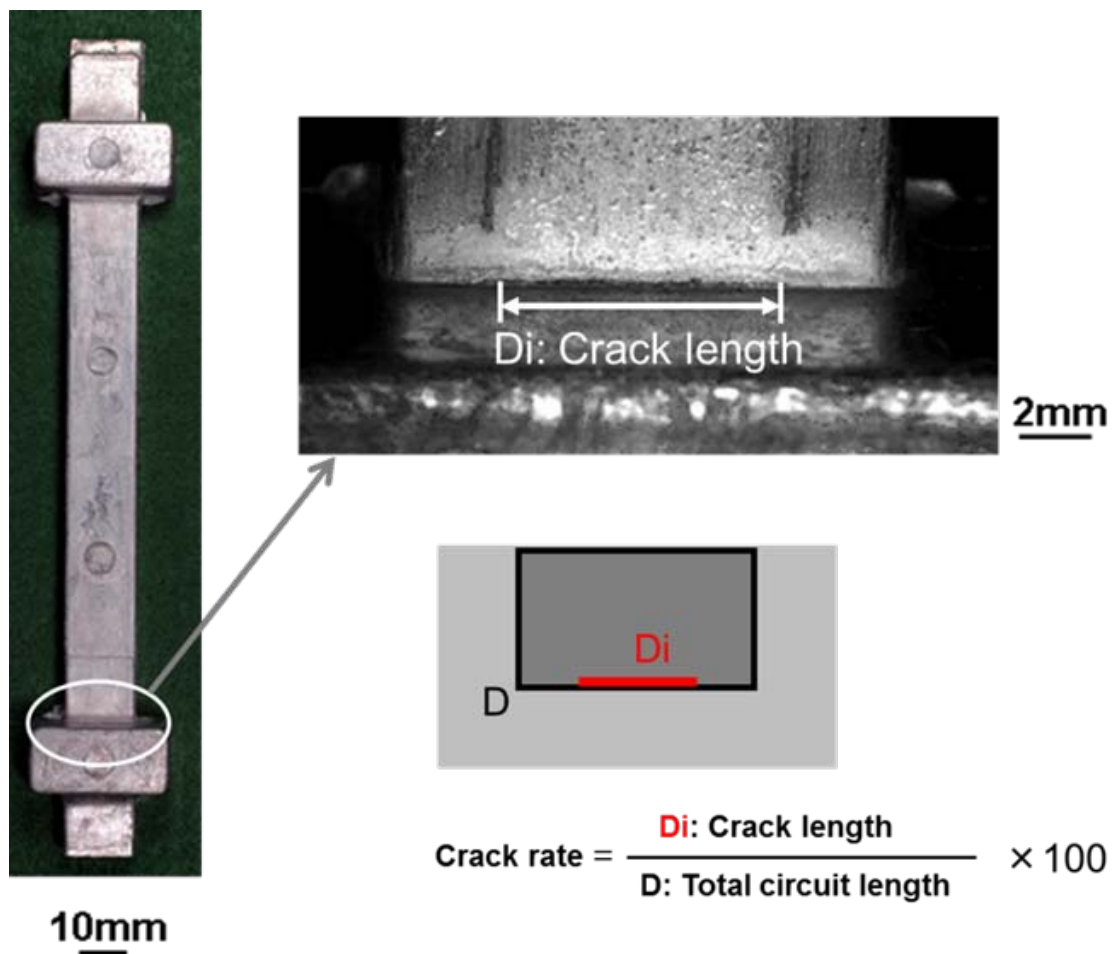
Crack on the actual die-casting test specimen and definition of crack rate.
